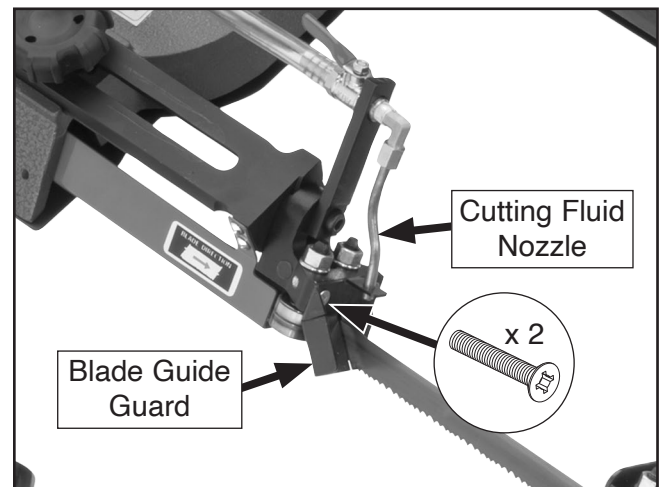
Location of front blade guide guard and cutting fluid nozzle.
